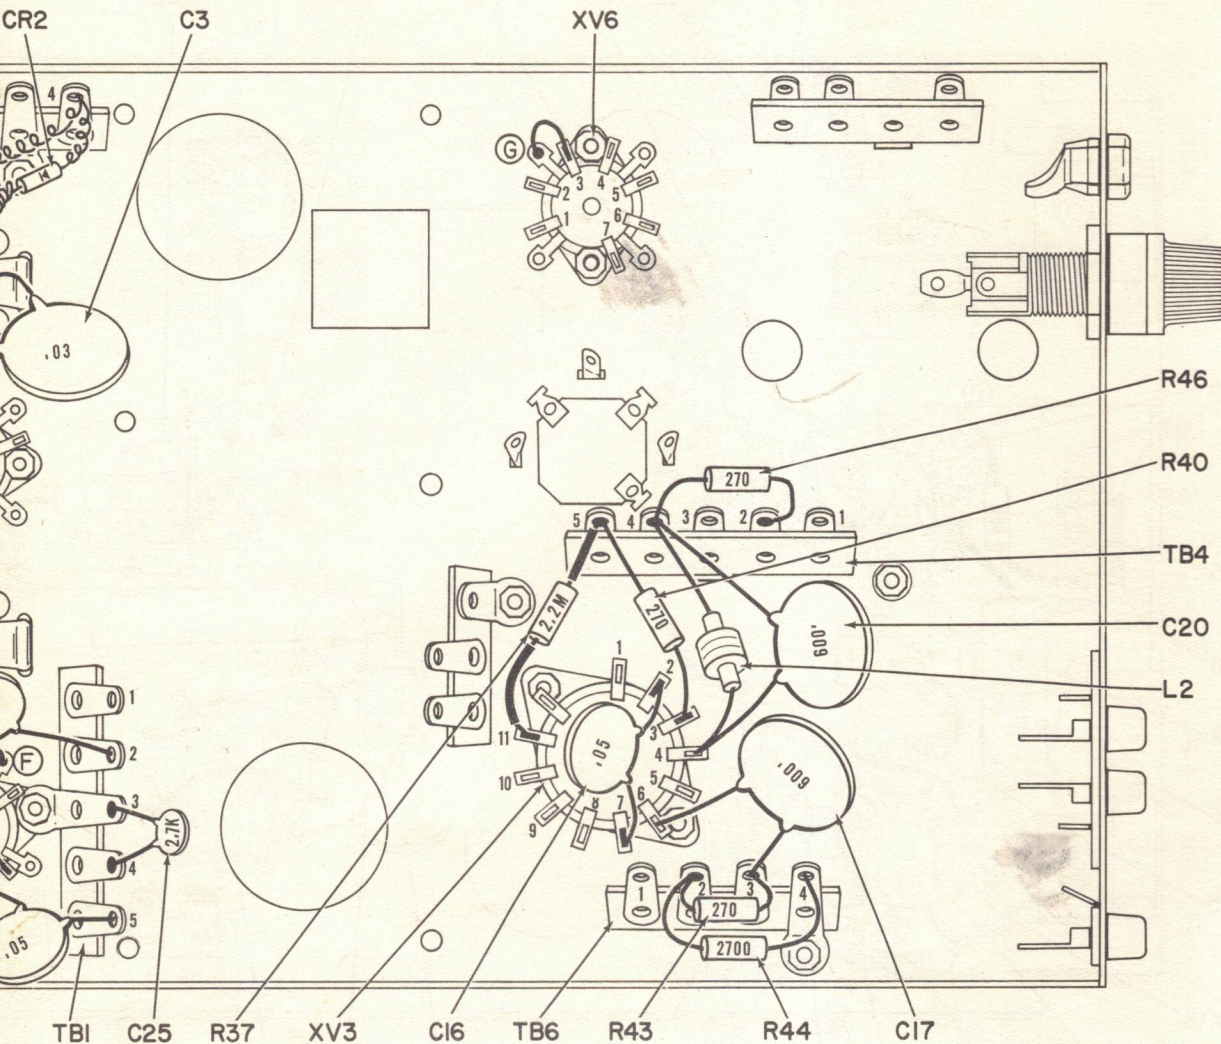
C. Bottom Chassis Wiring (Cont'd.)
